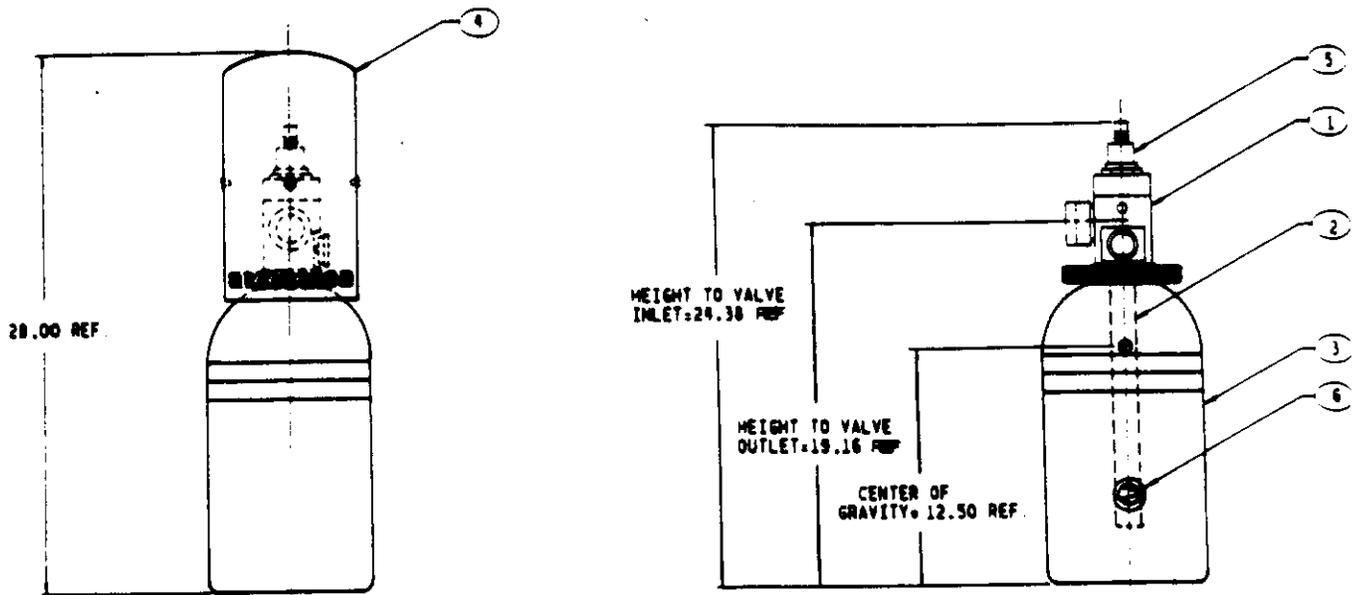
Cylinder Assembly, Halon 1301, 15 lb. Size 2, Class I
